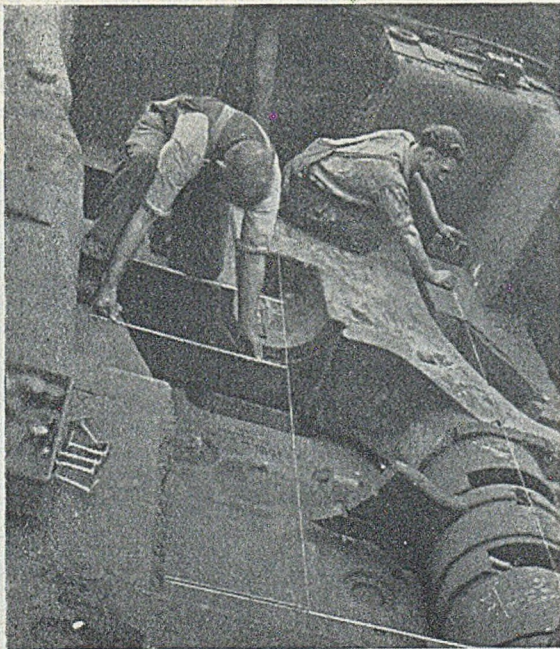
Placing the Bottom Cores in Position in the Cylinder Mould and Checking their Centre-lines.
